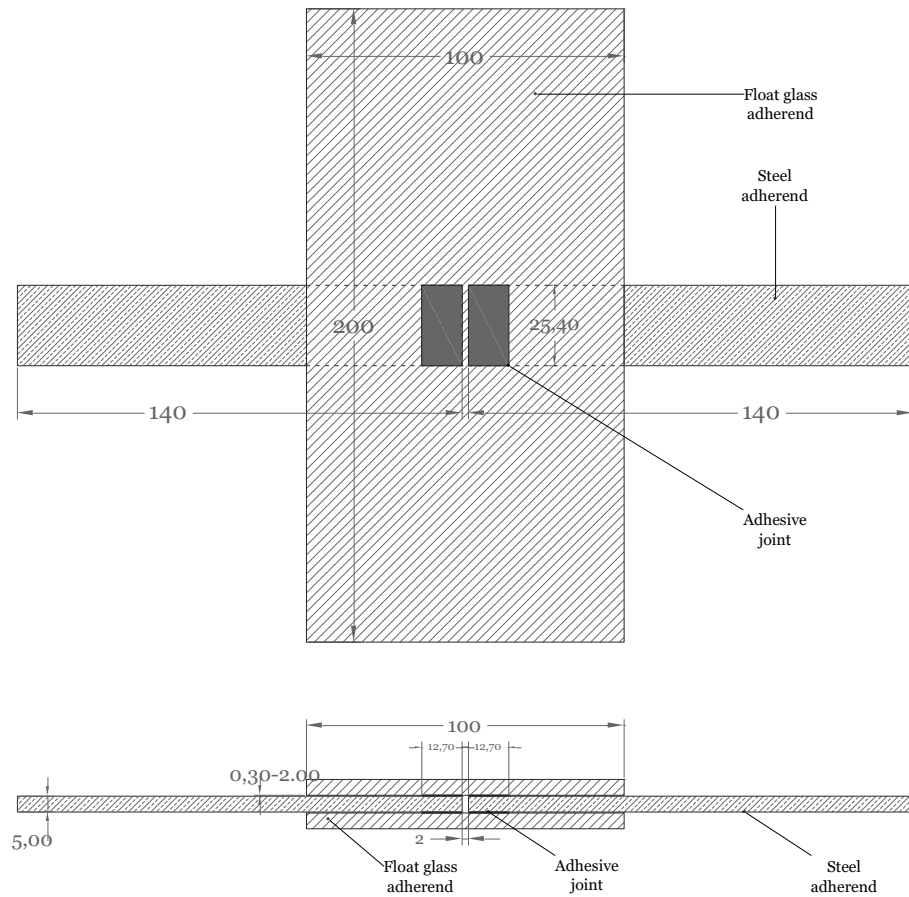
Double-lap specimen geometry (mm) ; section and plan view.
